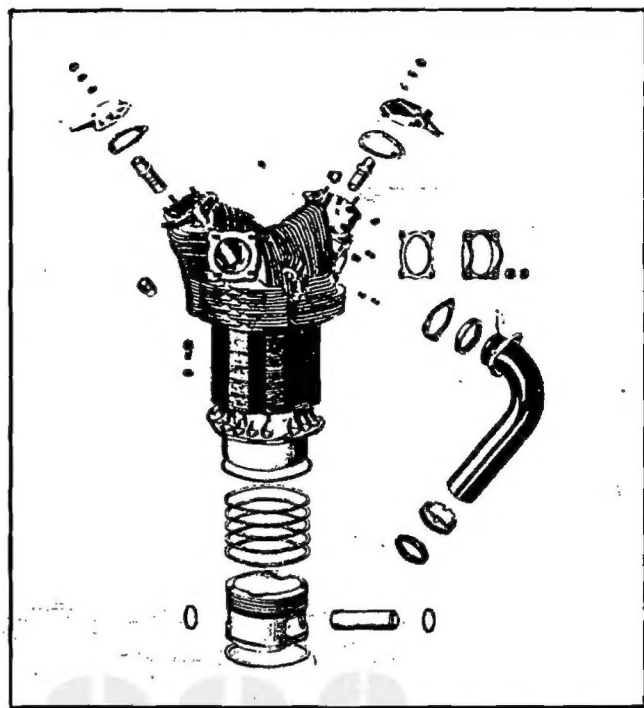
Cylinder, Intake Pipe, Piston, and Piston Rings
